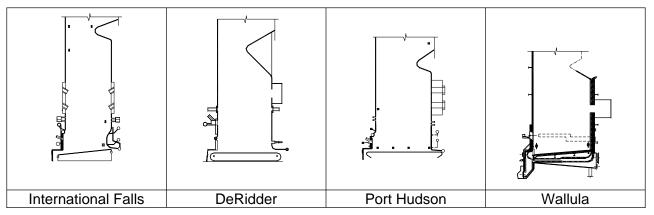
Section views of Stoker Boilers having a Commercial Design Package prepared
